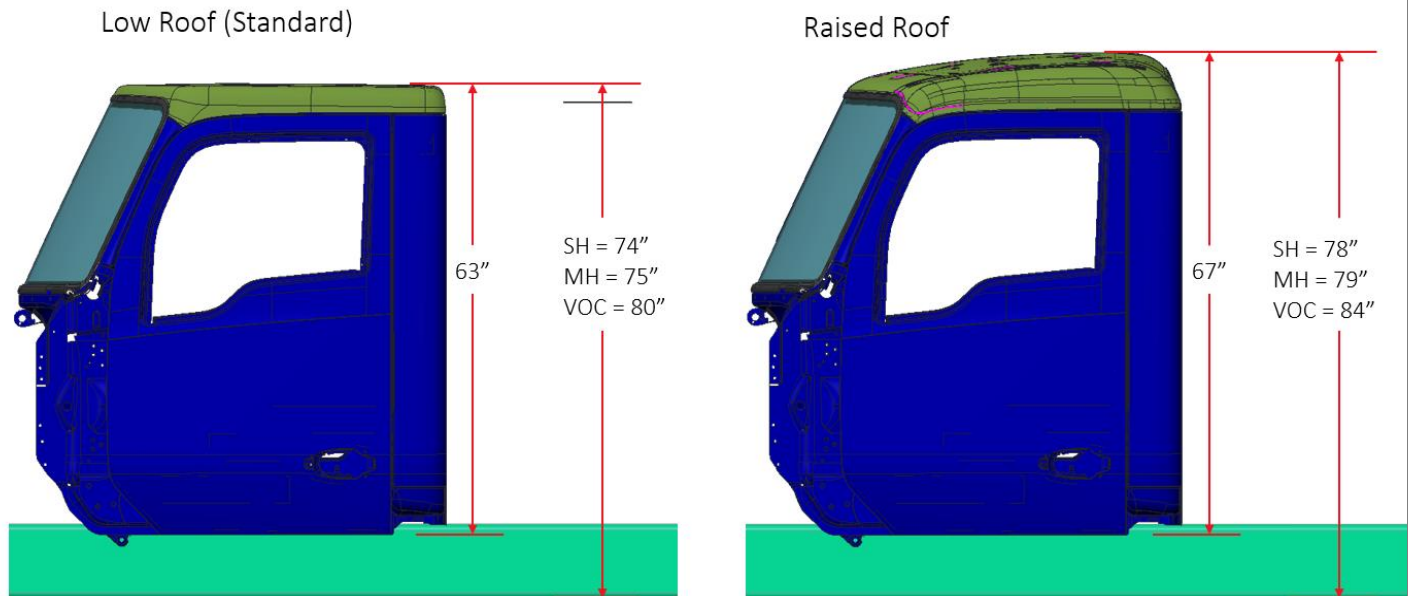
Low Roof and Raised Roof Cab Height 2.1m Medium Duty
